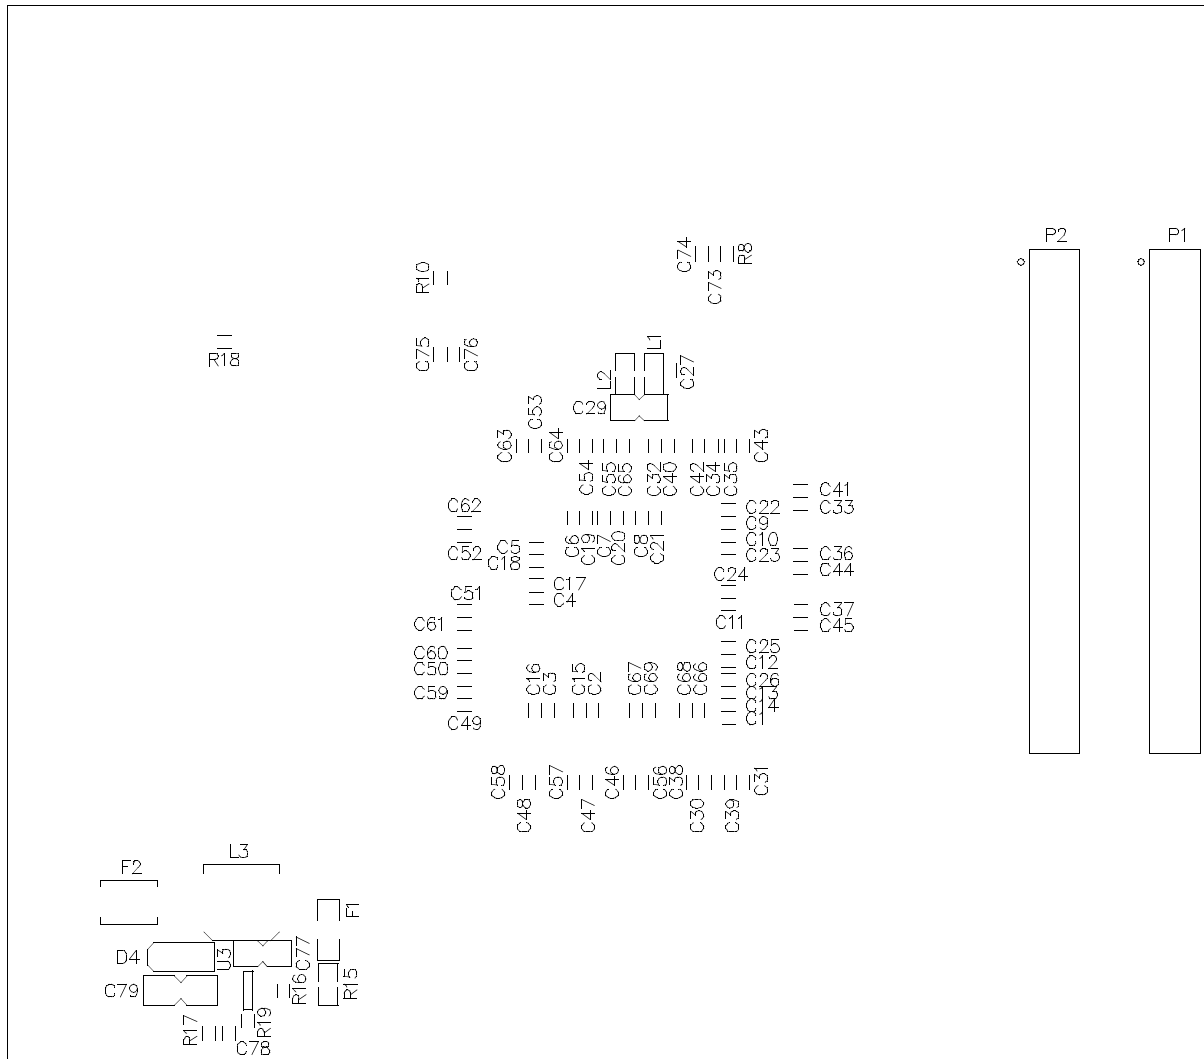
S5U13748P00C100 Board Layout - Bottom View
